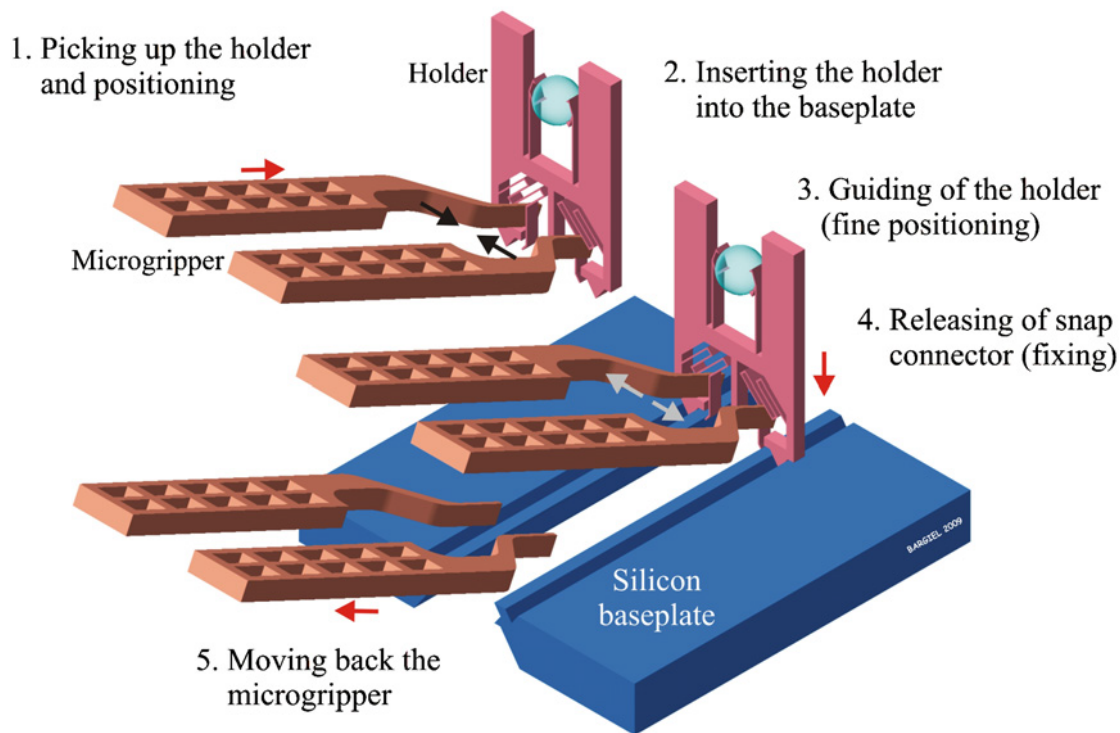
General concept of holder assembly based on the use of a robotic active microgripper as presented in [10]. The geometry of a gripping tool, performing the insertion and displacement of the holder within the rail of the baseplate, is illustrated.
